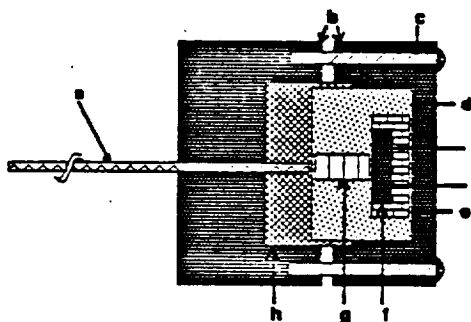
Detector Housing Assembly. a) Single Fiber; b) PVC Assembly Body Housing; c) Nylon Screws; d) Delrin Filter Adapter; e) Delrin Detector Housing; f) Photodiode; g) GRIN Lens; h) Interference Filter.
